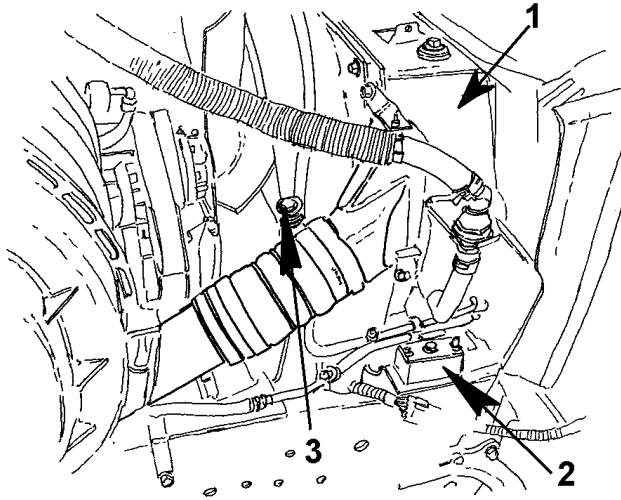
Charge Air Cooler Connections (Passenger Side Shown)
